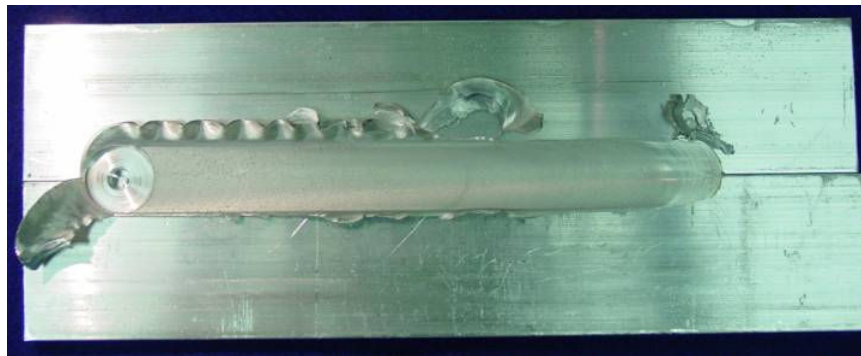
Weld sample with 1 millimeter ramp and no torque control.
